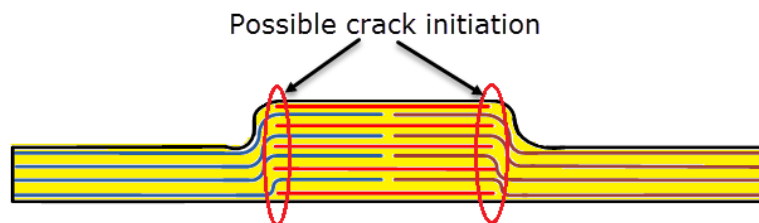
Schematic drawing of a multiple-covers joint with possible crack zones highlighted
